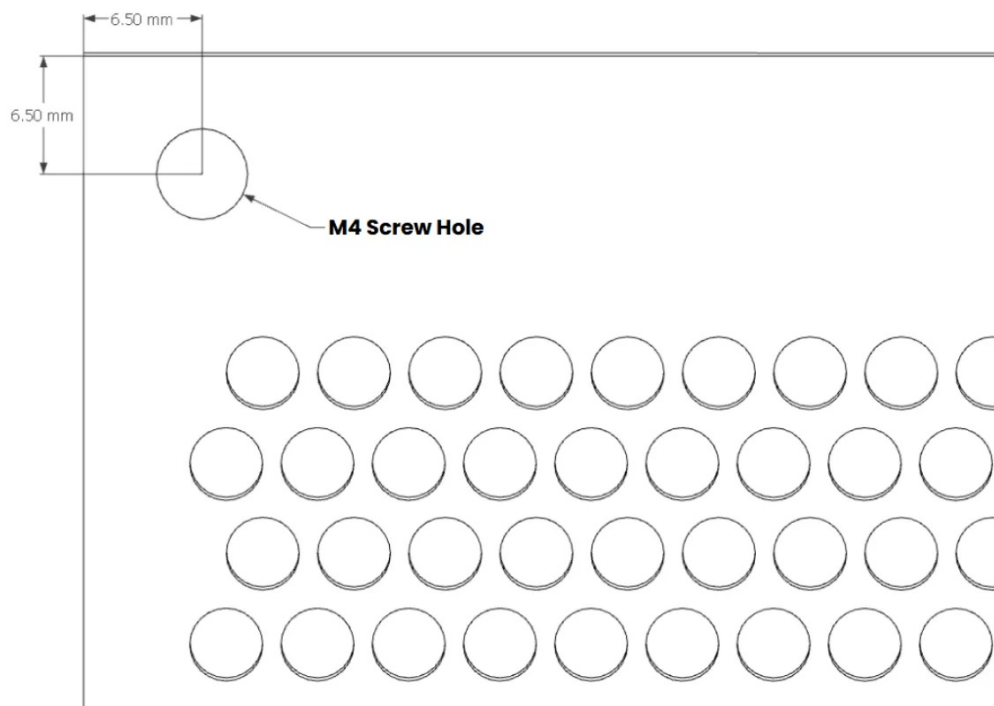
M4 screw hole position (only left side shown)
